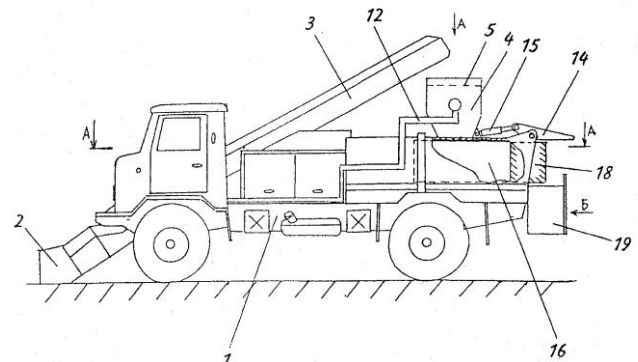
Snow cleaning machine (Patent RU 2207427)
